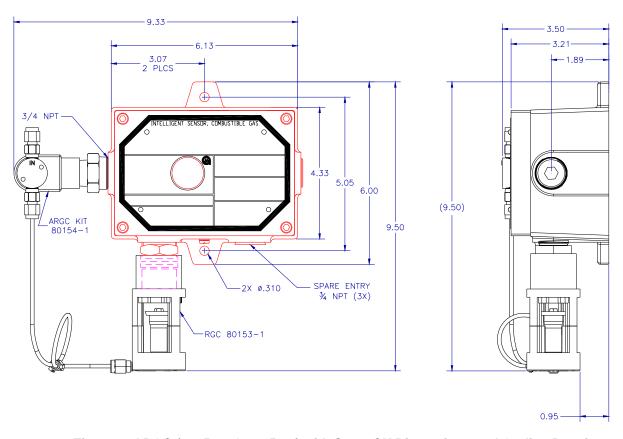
ARGC (80154-1 & 80153-1) with S4000CH Dimensions and Outline Drawing
